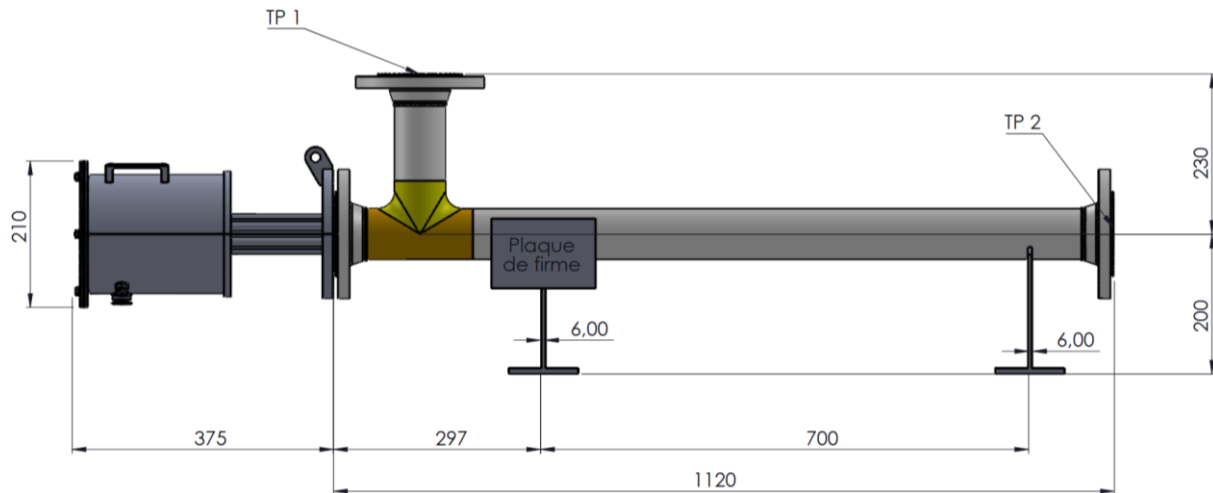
Electric heater by SELETECH EQUIPEMENT SAS. Sizes are in millimetres.
